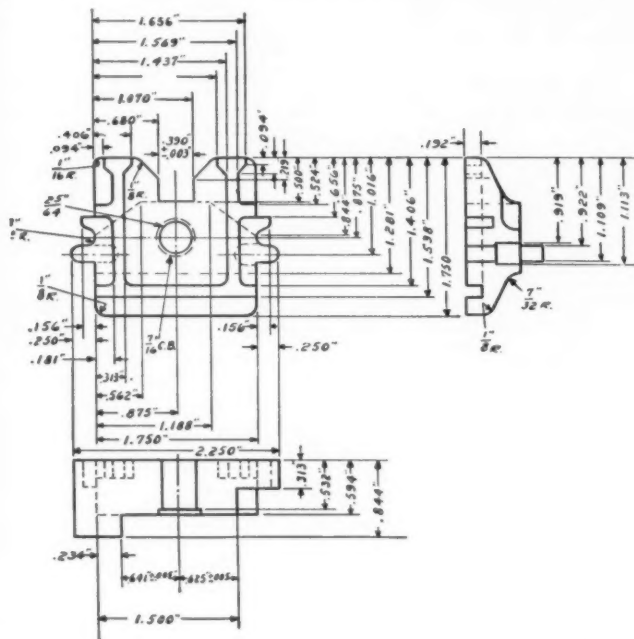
DESIGN OF A PART TO BE MADE FROM A PLASTIC COMPOUND AND DIMENSIONED FOR THE CONVENIENCE OF THE MOLD DESIGNER AND THE INSPECTOR
